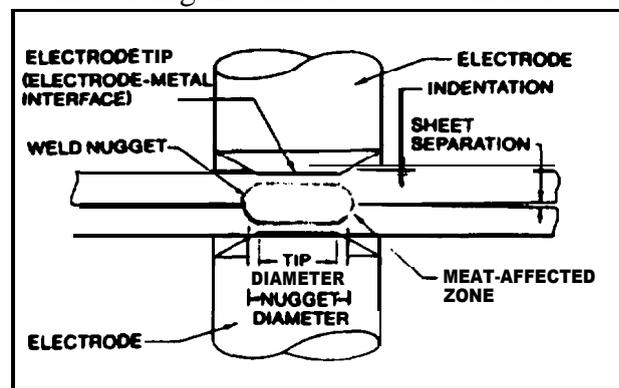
In spot welding, heat is produced by electrical resistance between copper electrodes. Pressure is simultaneously applied to electrode tips to force metal together to complete fusing process. Spot-weld-nugget size is directly related to tip size.
